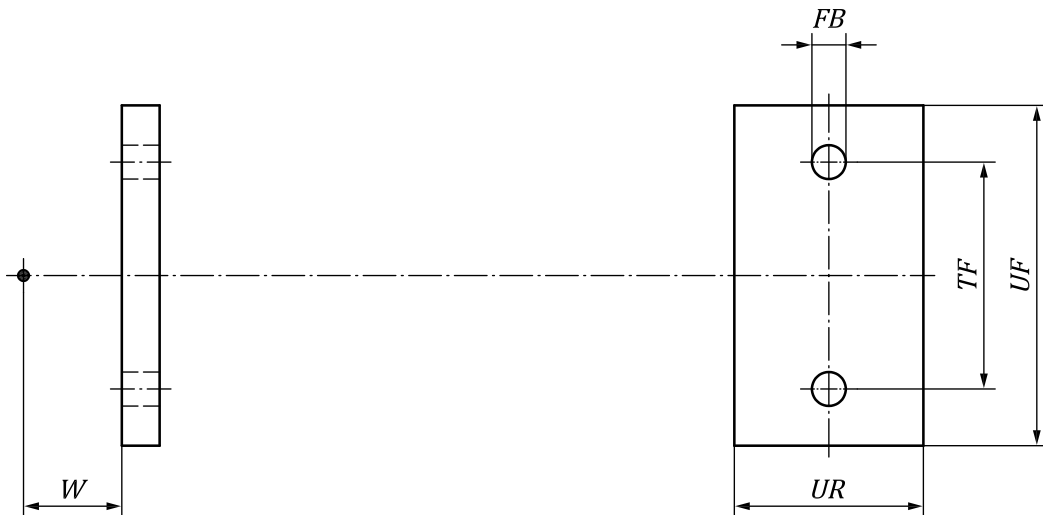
Head rectangular flange (two hole) mounting (MF8)
